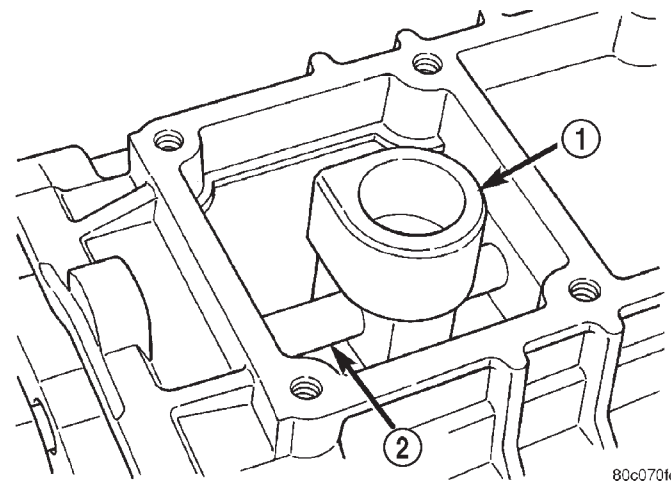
Installing Shift Shaft Lever And Bushing
